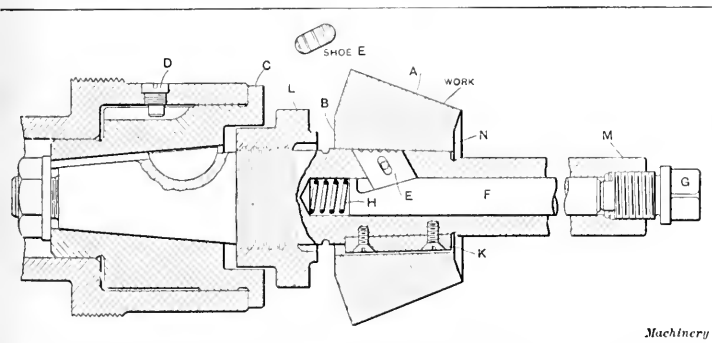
Arbor having Adjustable Shoe *E* which bears against Taper Bore of Pinion Blank
